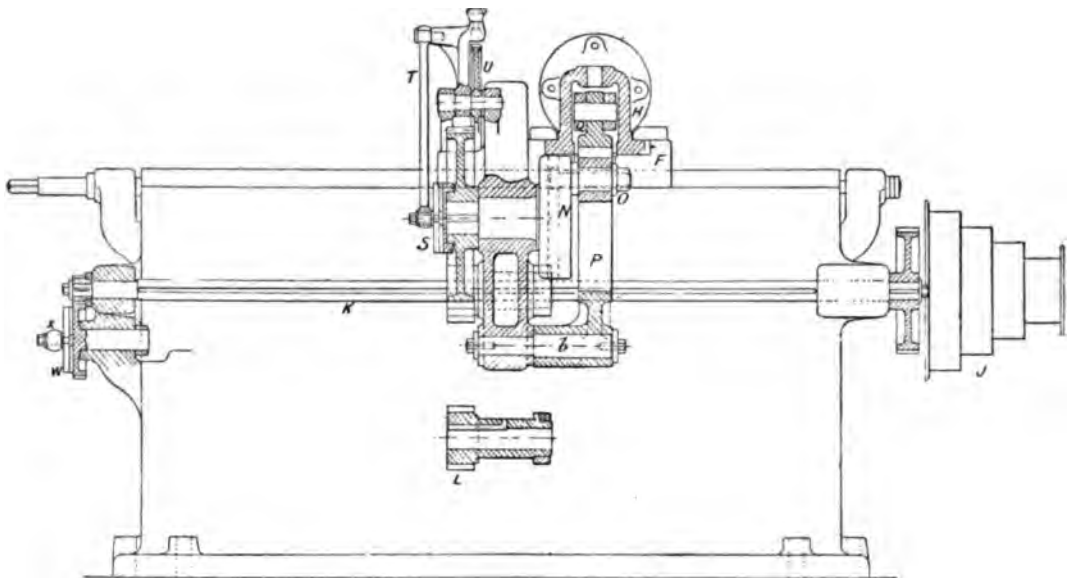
12-Inch Shaper. (Rear Elevation.)
